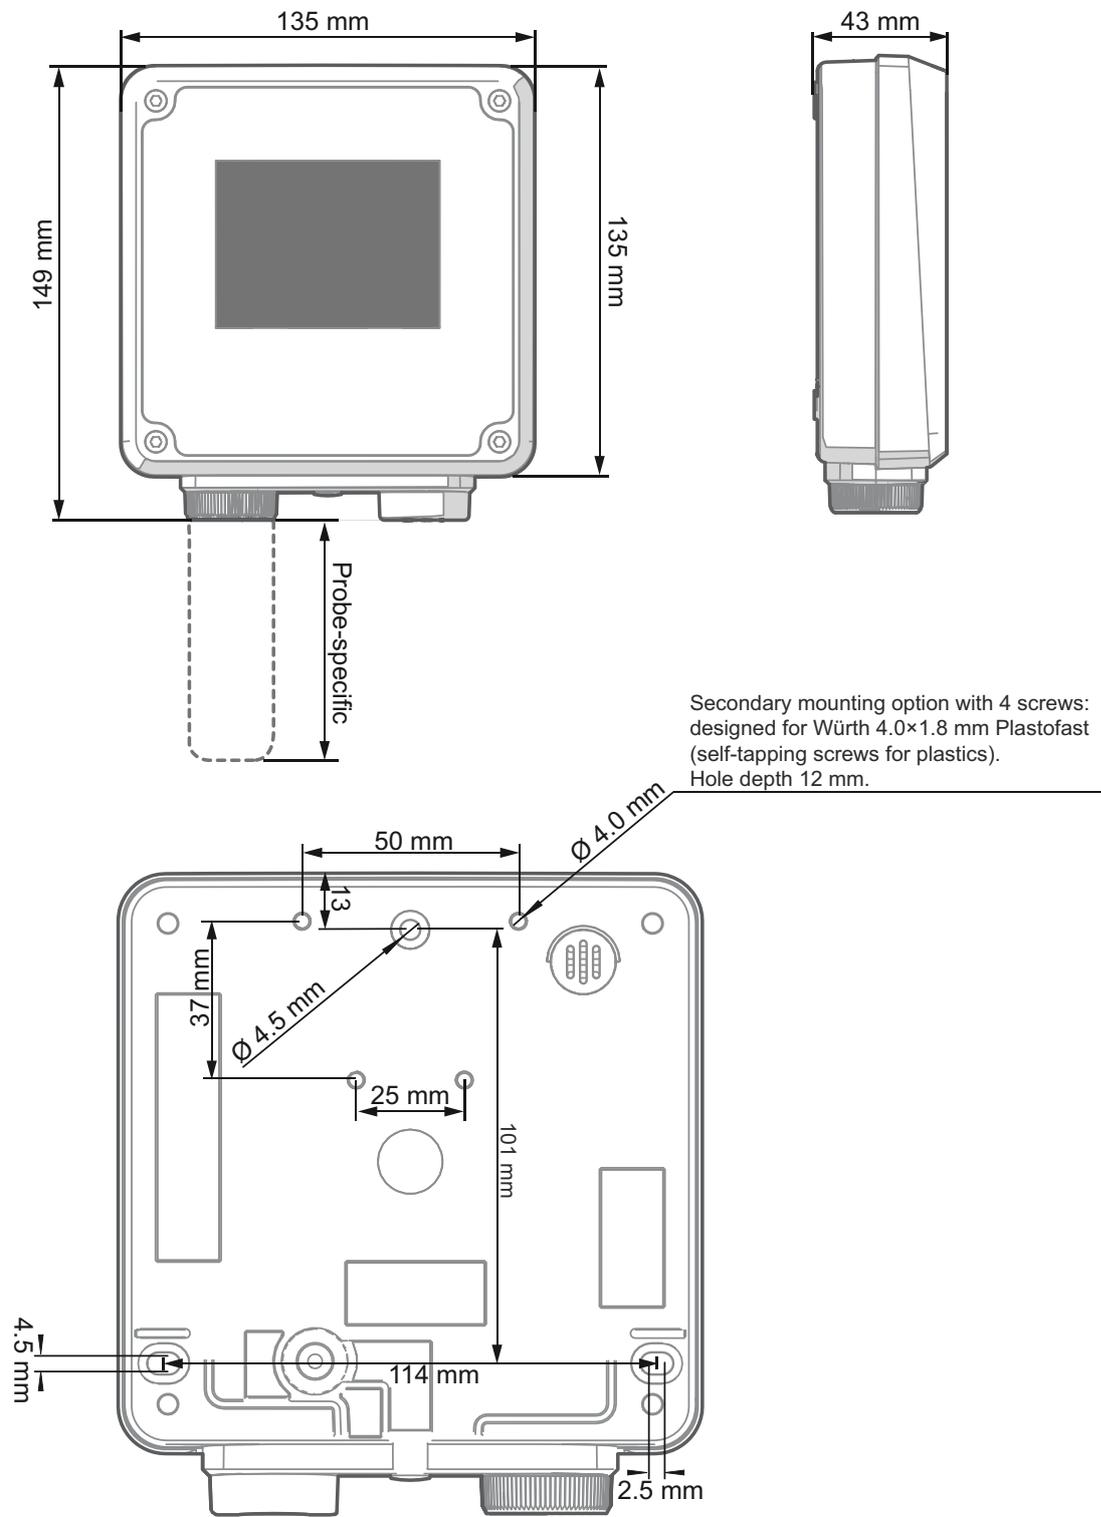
Indigo Transmitter Dimensions in Millimeters (mm)
